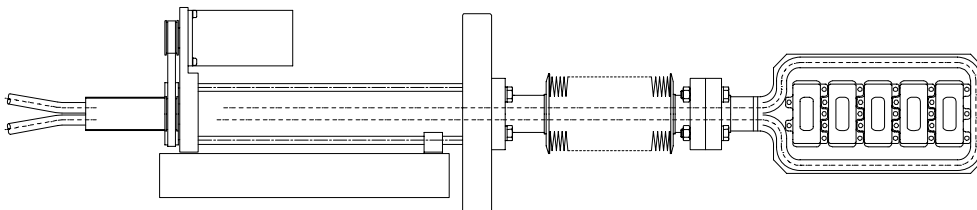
Example motorized water-cooled attenuator assembly
